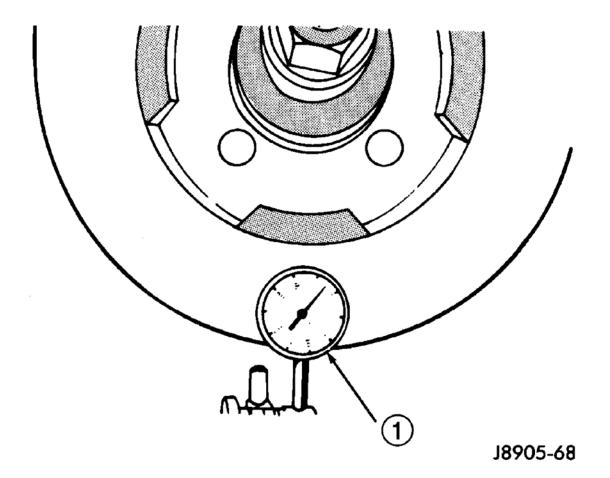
Checking Rotor Runout & Thickness Variation Courtesy of CHRYSLER LLC
